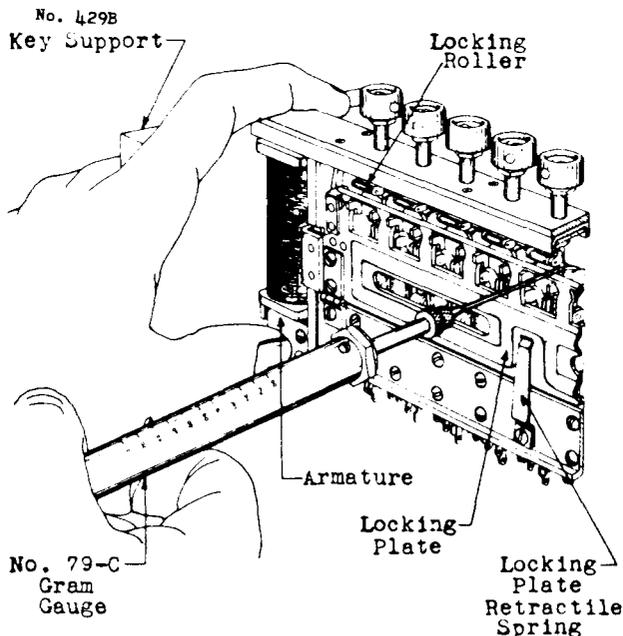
Measurement of Locking Plate Retractable Spring Tension
